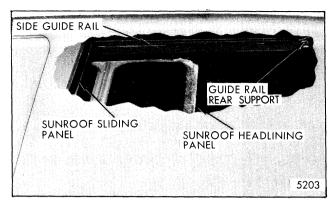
Sunroof Panel Headlining Engagement in Side Guide Rail
